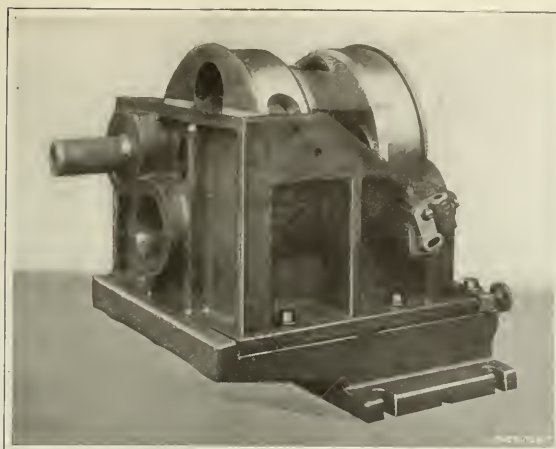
Fixture used on Heald Grinder for finish-grinding Spindle Bearings and Index-pin Bushings in Cylinder
